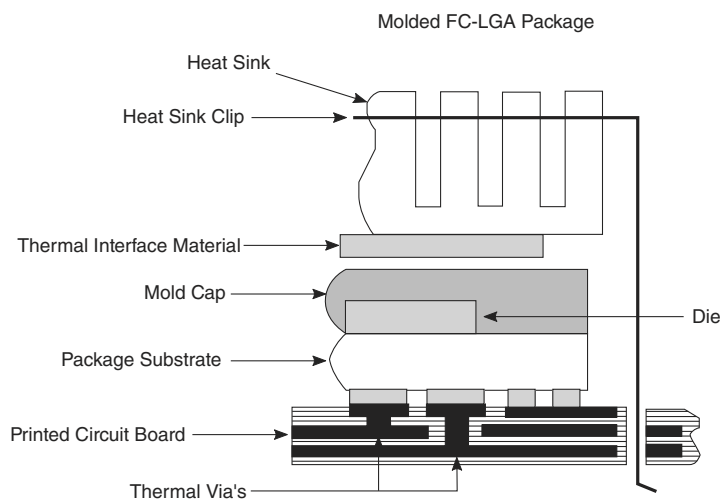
Package exploded, cross-sectional view - molded FC-LGA
